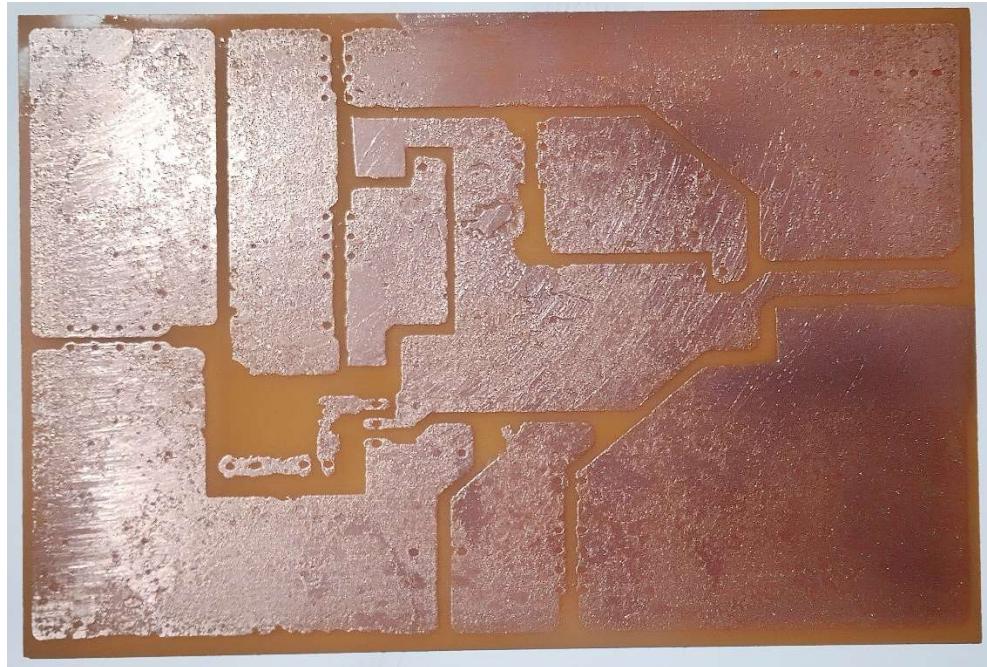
17: PCB layout (Copper, solder-mask, silkscreen) layer (1)
